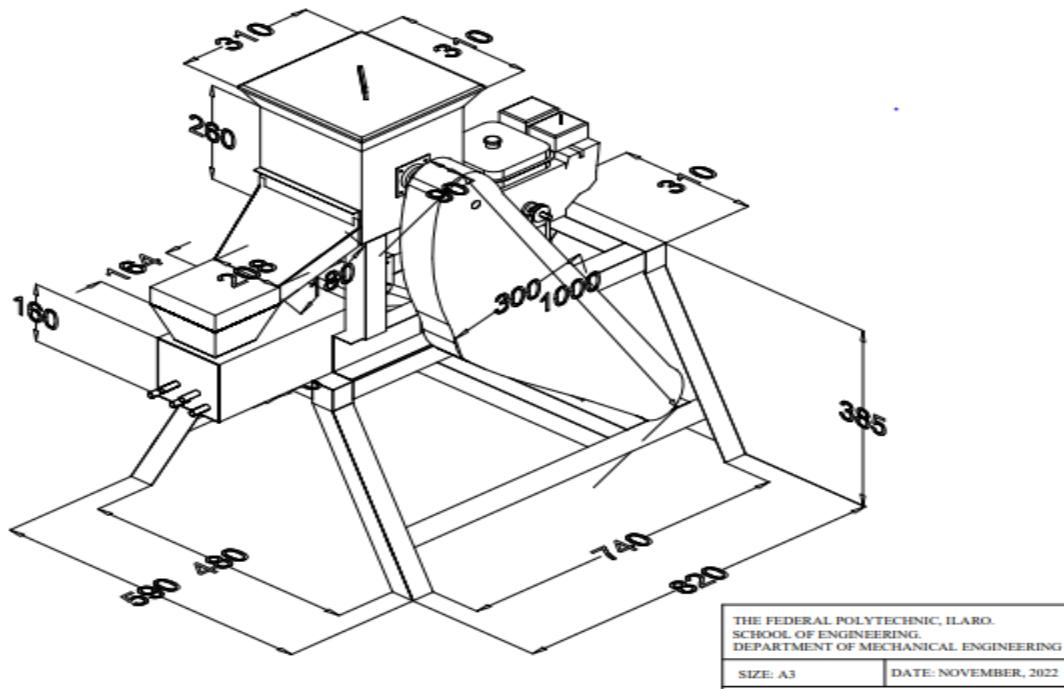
Isometric View of Kokoro Pasta Extruding Machine
